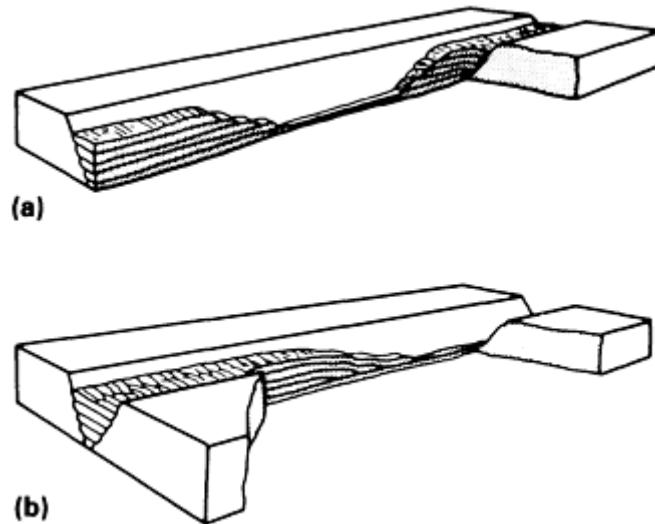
METHODS APPLIED TO THE OFW PROCESS TO DEPOSIT FILLER METAL WITH MINIMUM WELD STRESS. (A) BLOCK SEQUENCE. (B) CASCADE SEQUENCE
